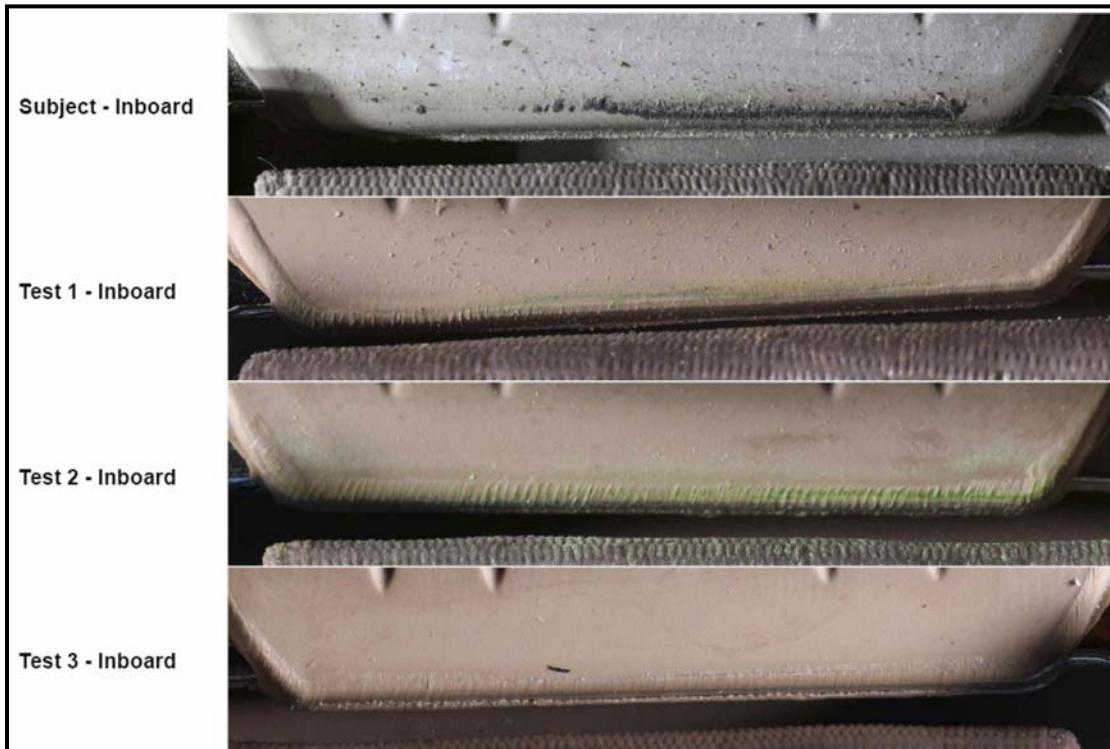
Marks on H.G.H.’s latch plate and Plaintiff’s tests latch plates, inboard side⁴⁴
